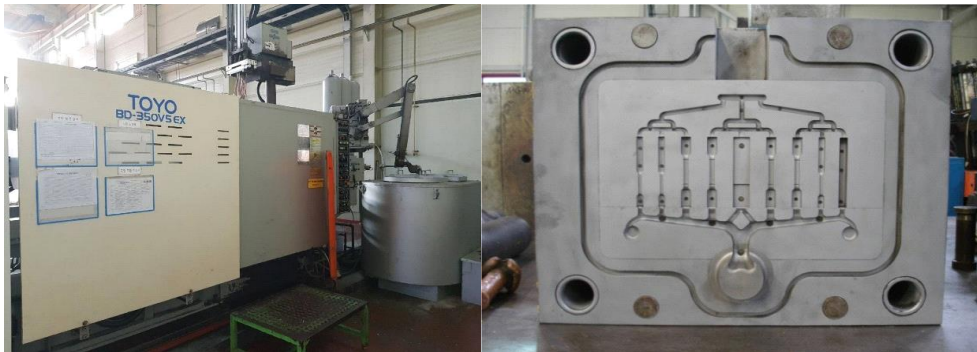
(a) 350 Ton Die Casting Machine (b) Die-cast mold
